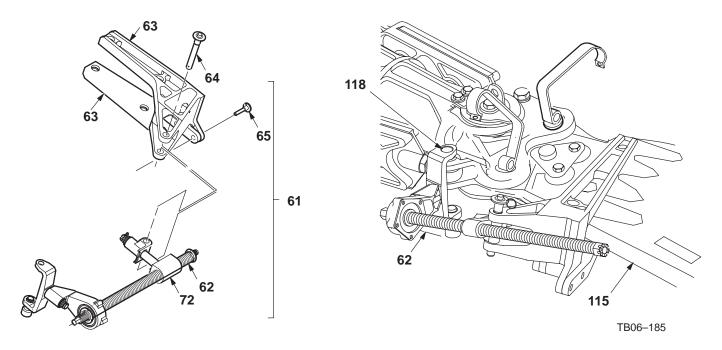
Blade Positioning Assembly on R/H FWD Main Rotor Blade
